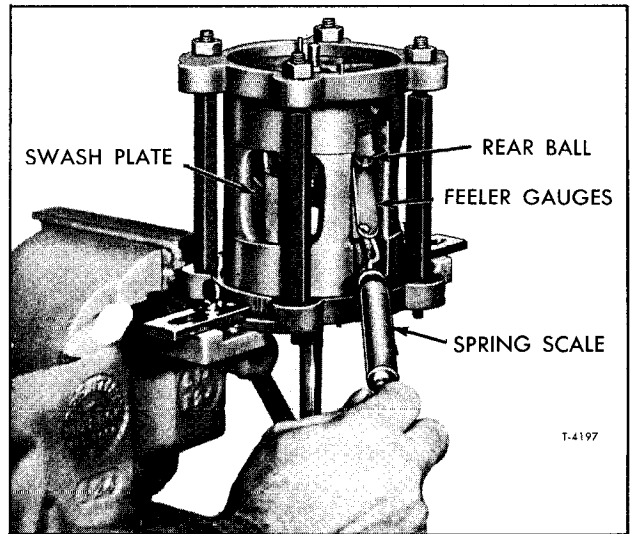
Checking Clearance Between Rear Ball and Wobble Plate
